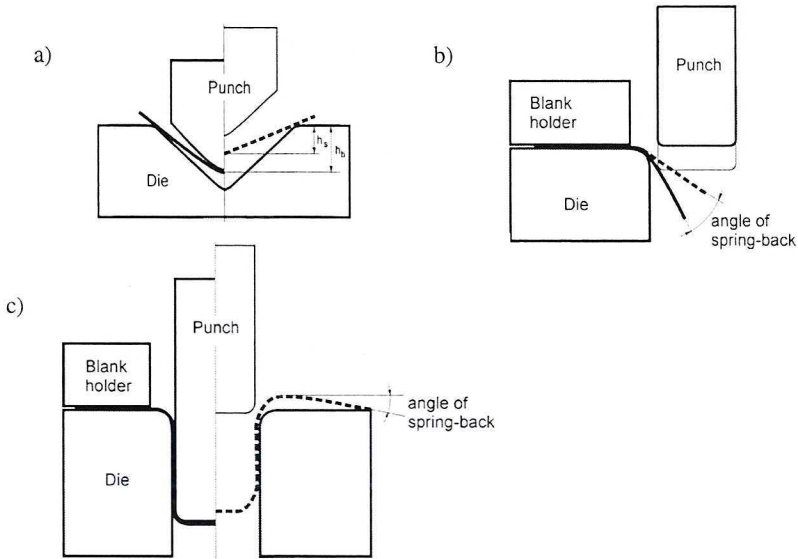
Scheme of; (a) *V*-type, (b) *L*-type and (c) *U*-type sheet metal bending tests
